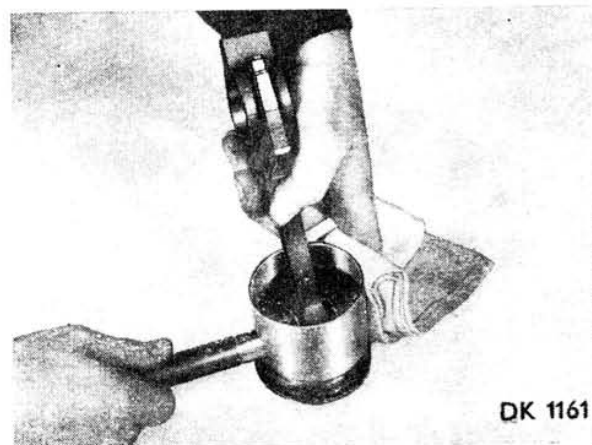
/1 - Press-fitting of Gudgeon Pin into Piston Using MP 1-104 Drift
